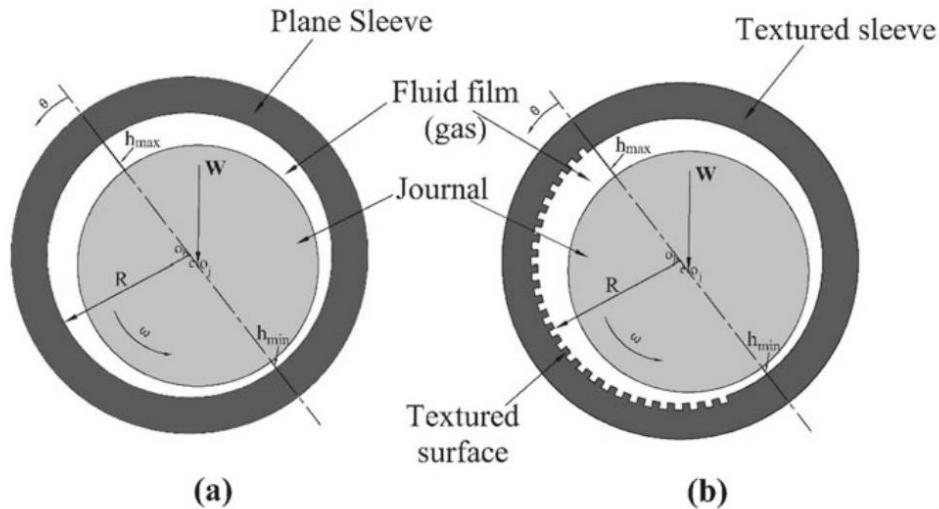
Cylindrical bearing configurations : (a) plain bearing, (b) textured bearing.
